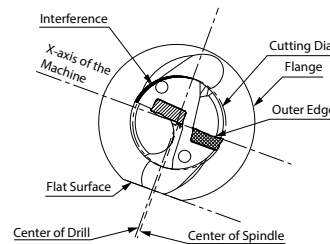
Excessive Offset (For Smaller Hole Diameter)
